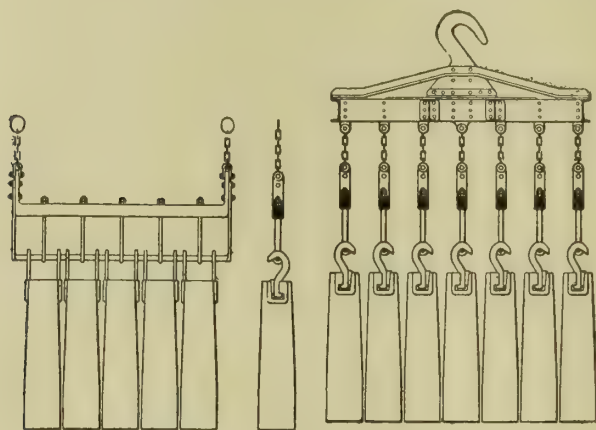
LIFTING DEVICE WITH STEEL HOOKS.
